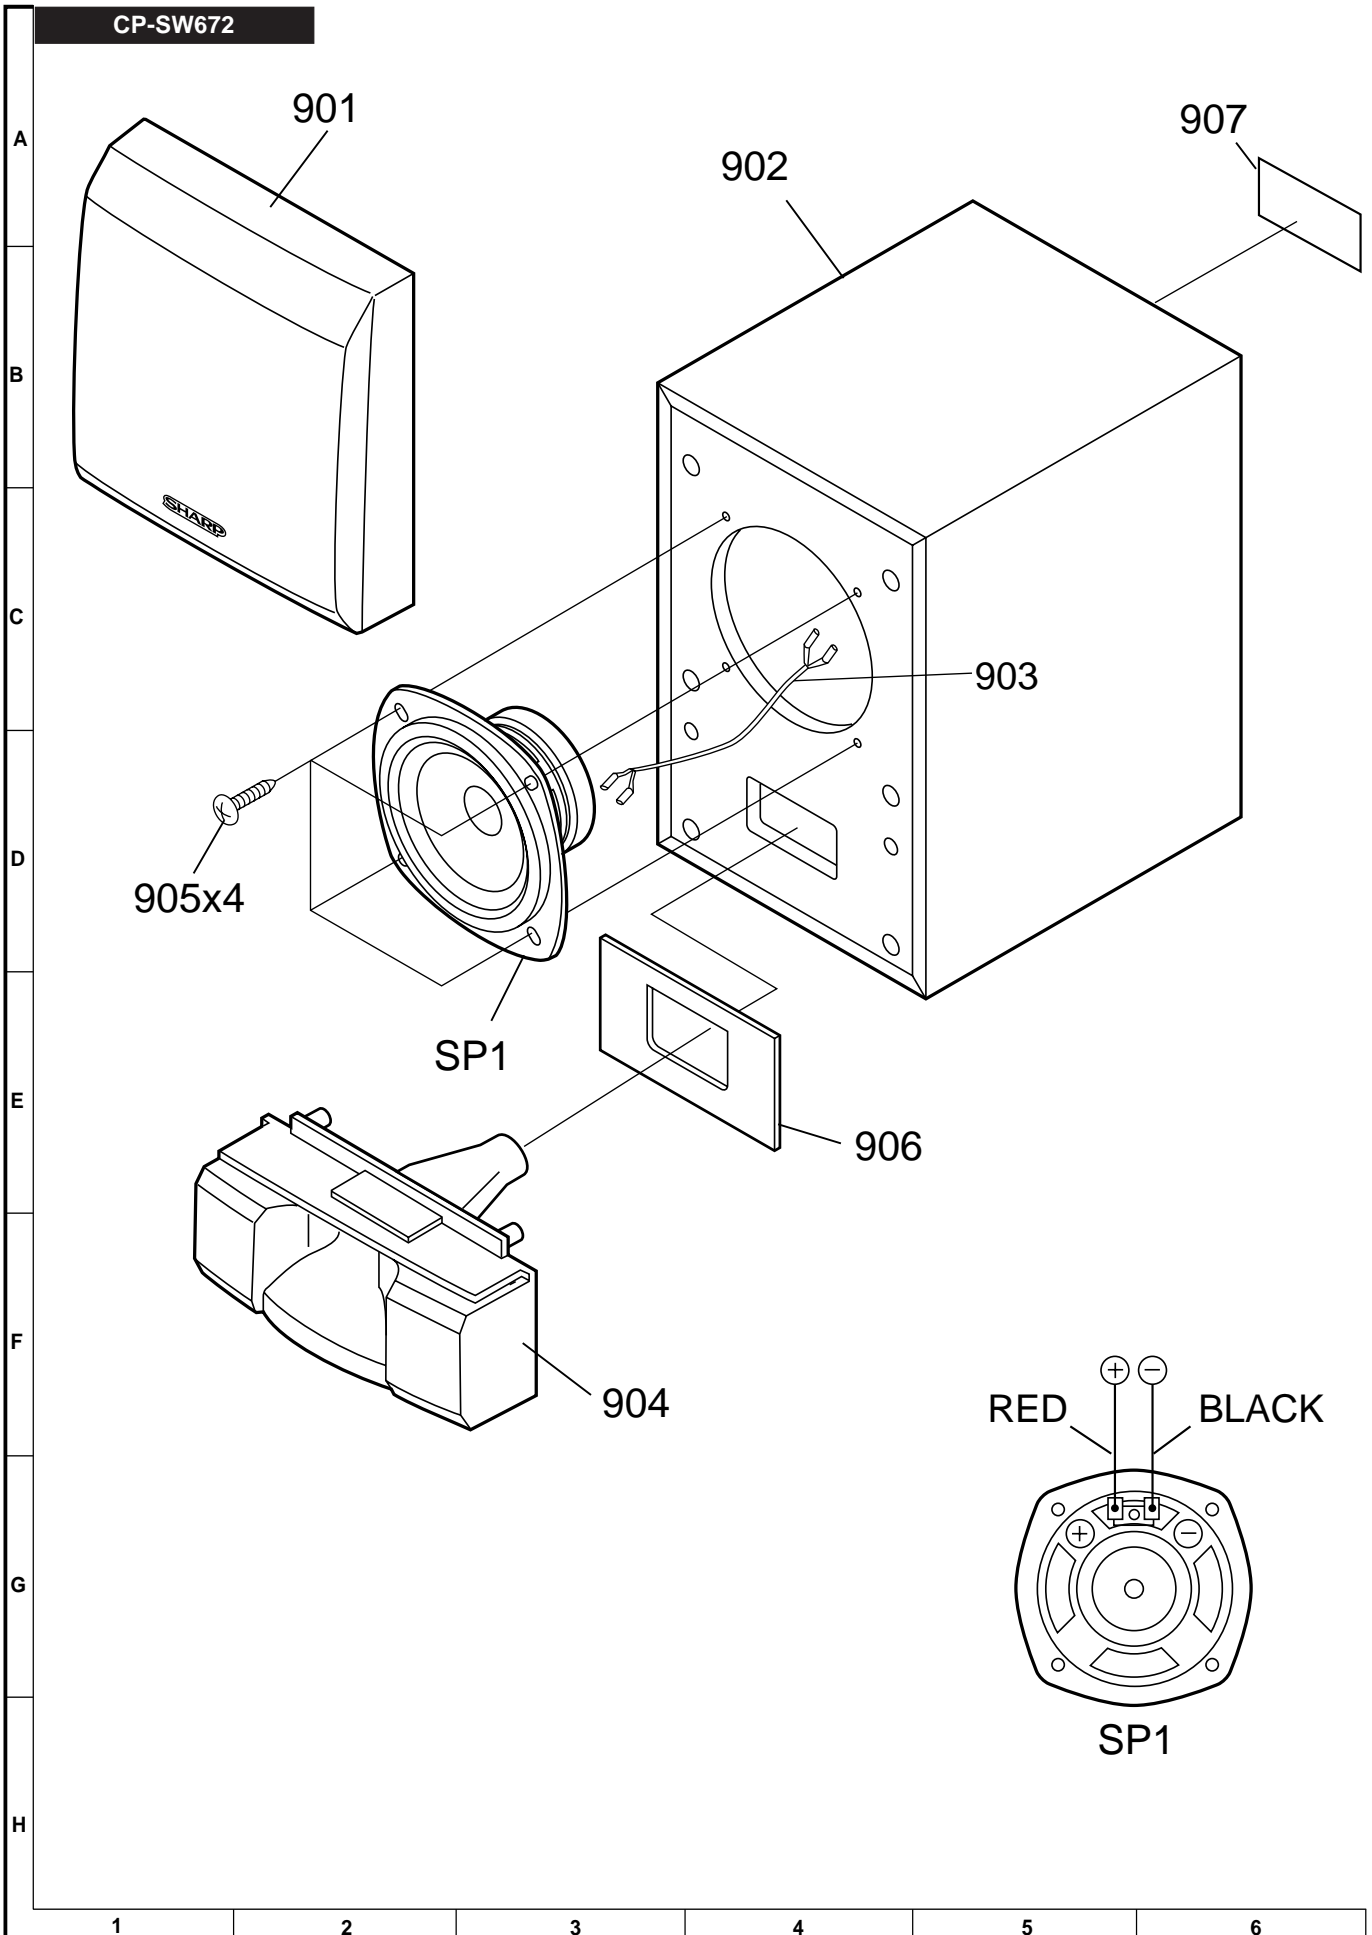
SPEAKER EXPLODED VIEW (2/3)
